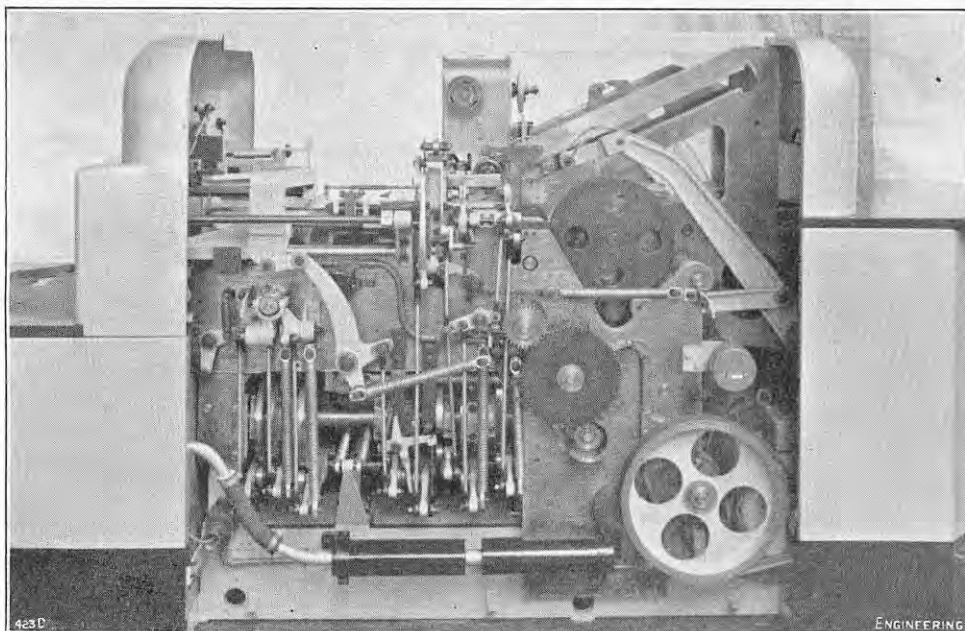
RIGHT-HAND SIDE OF MACHINE WITH COVERS REMOVED.
